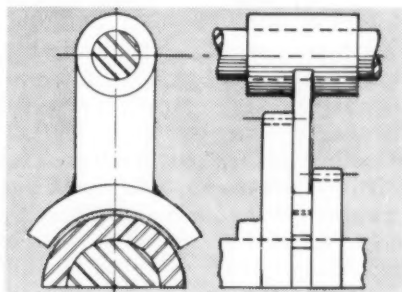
The shifting fork in this sketch is made from three pieces and designed to shift a cluster gear with inside faces  $5/16$  inch apart.
